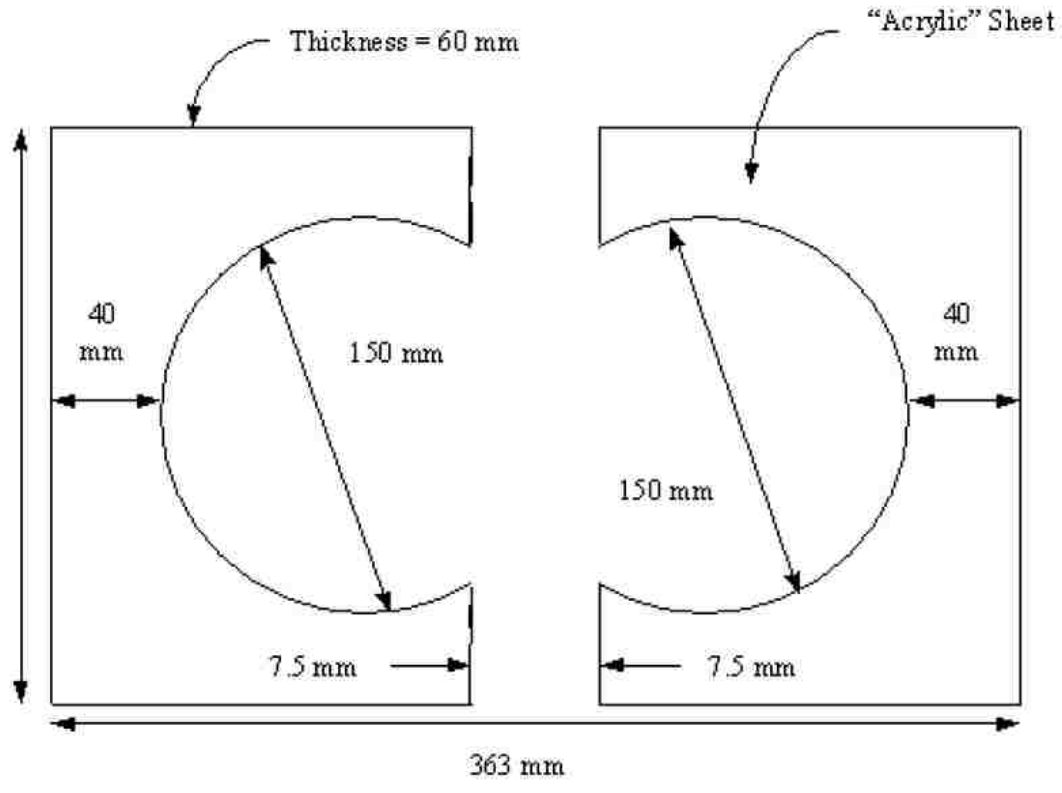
Hamburg Mold Plan View and Dimensions
